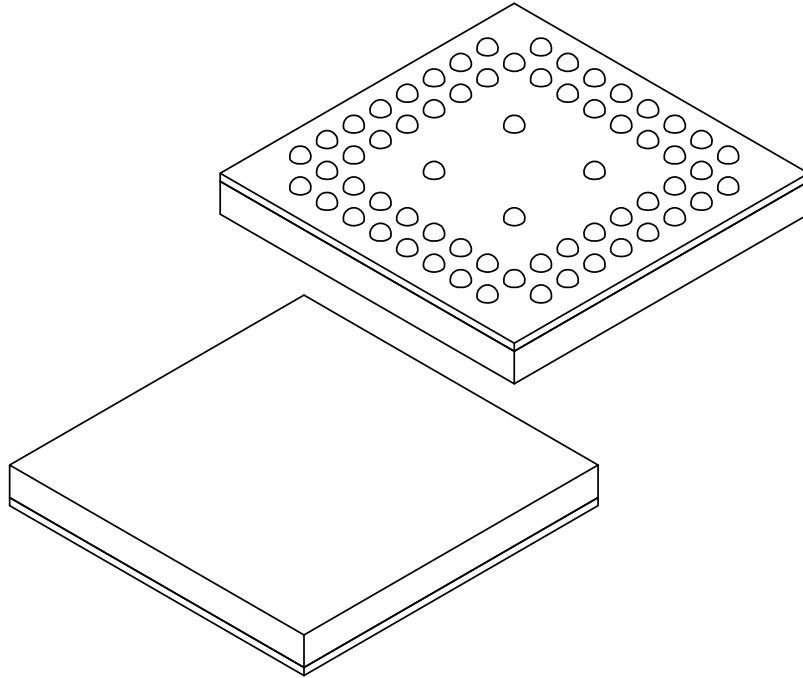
2HW Package Dimensions, Sheet 2
